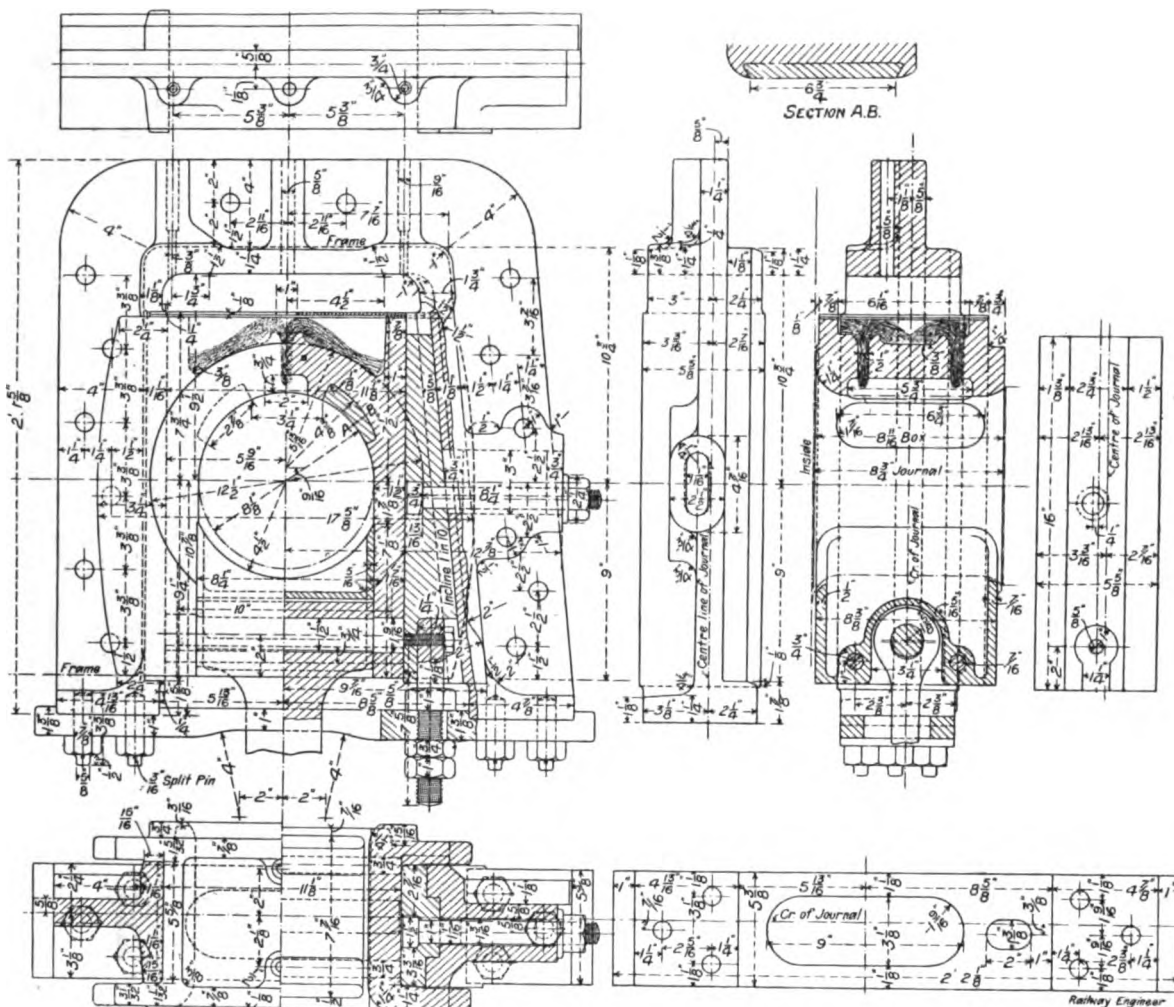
Driving Horn-Block and Axle-Box; Great Eastern Railway.
